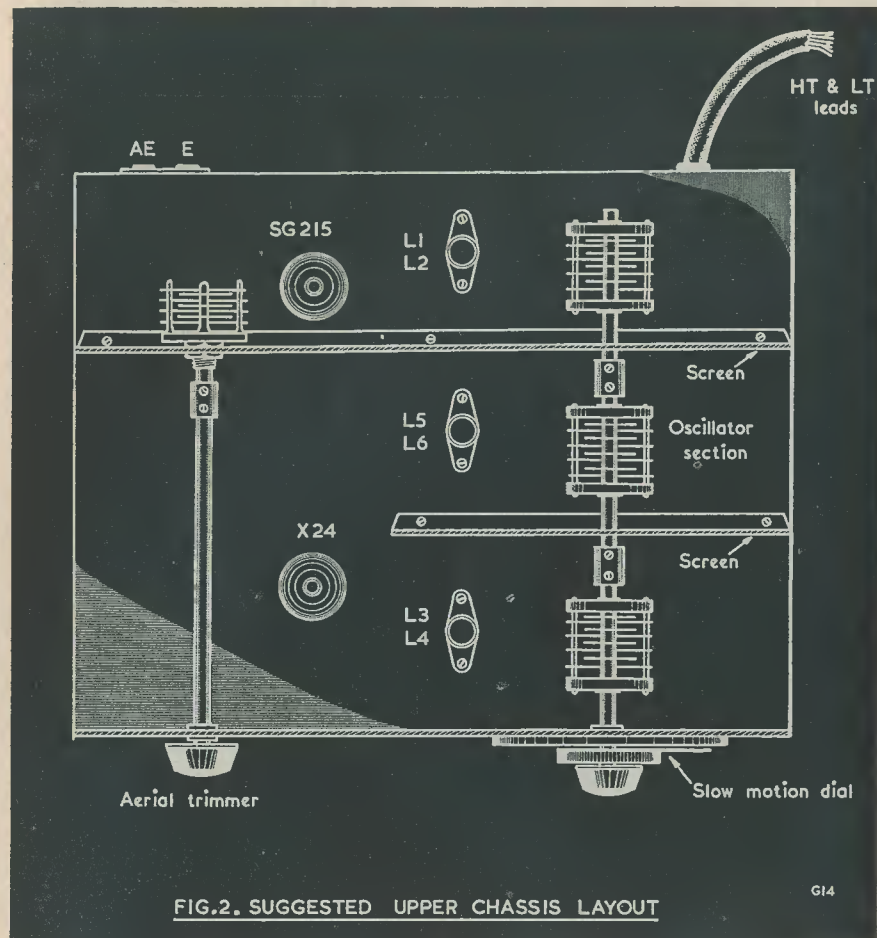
SUGGESTED UPPER CHASSIS LAYOUT
